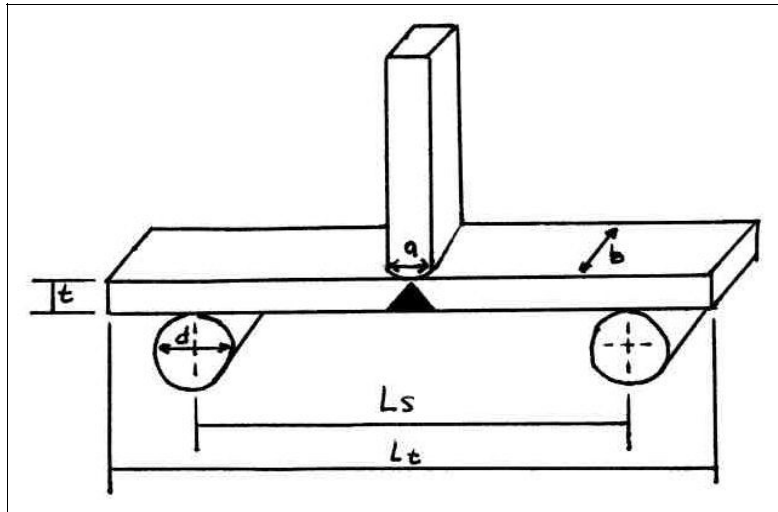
Typical three point bend test setup for welded polymers (DVS 1999).
